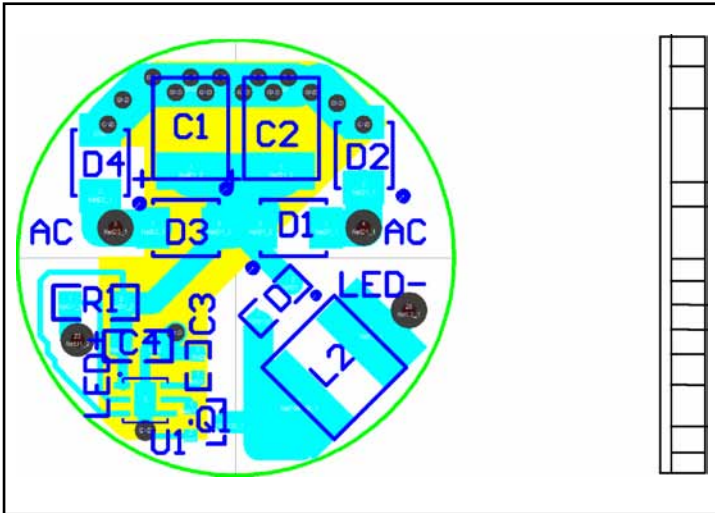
5W MR16 LED Lamp Driver PCB Board.
